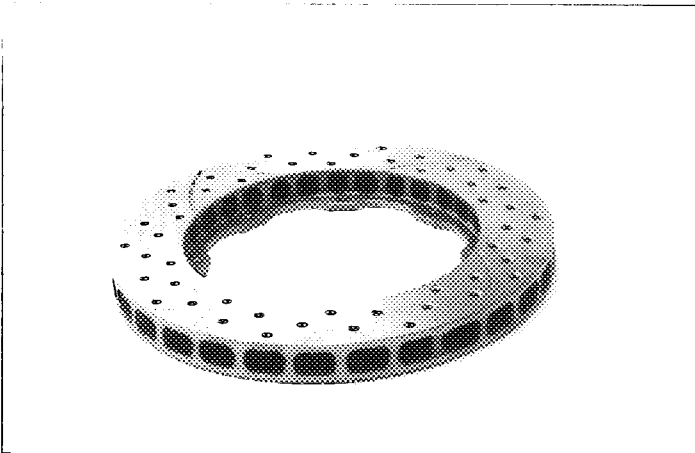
Front and/or Rear brake discs, TYPE Y
